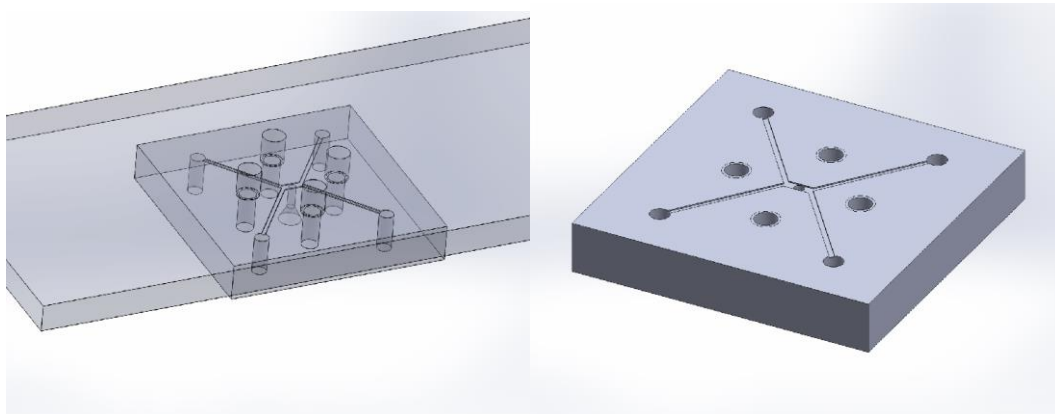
CAD drawing of manifold device modeled like the PDMS microfluidic manifold but made from aluminum Computer aided design (CAD) drawing done in Solidworks of assembled aluminum manifold device (left) and engraved channels (right). This device is an aluminum mimic of the PDMS microfluidic manifold device that was effective at switching solution composition and electrospinning microfibers.
